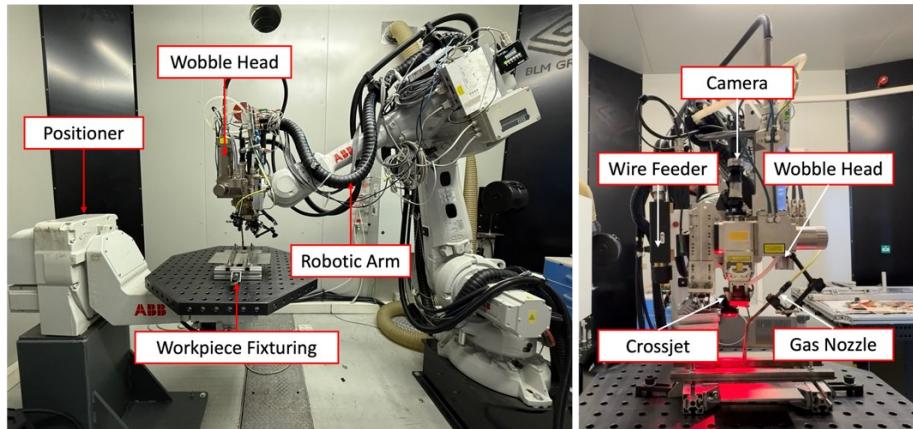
(a) Robotic experimental welding cell; (b) The wobble laser welding head
